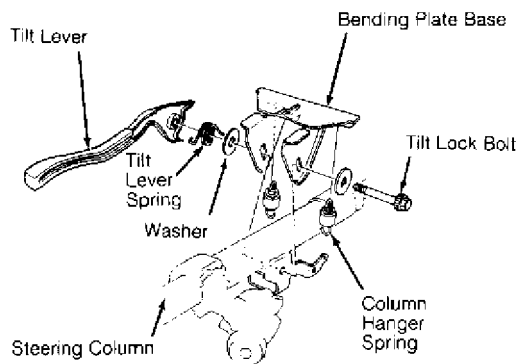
Exploded View Of Tilt Lock Assembly (Typical)
